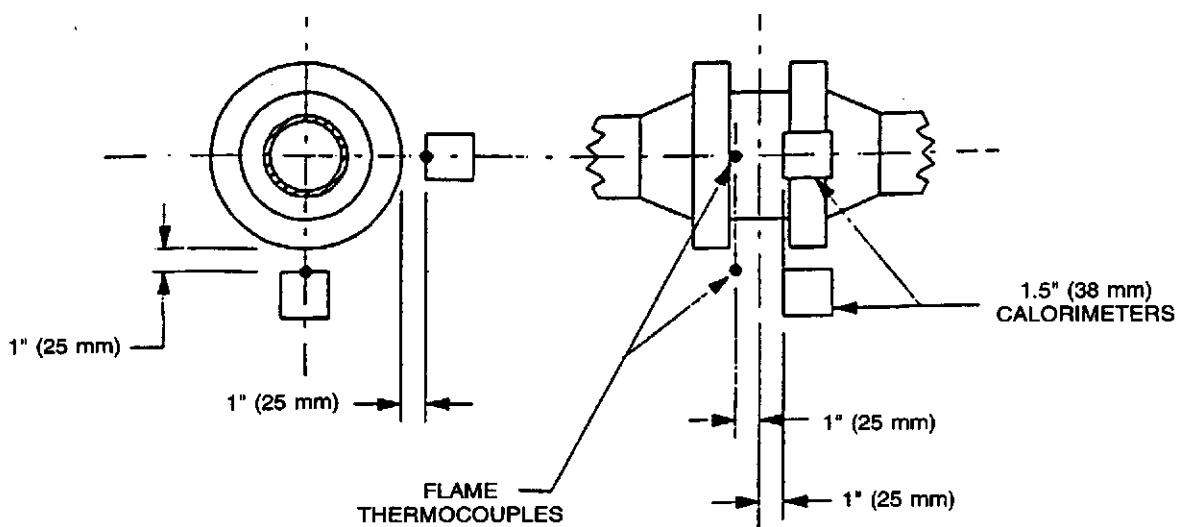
Location of Thermocouples and Calorimeters—Smaller Wafer Type Check Valves
